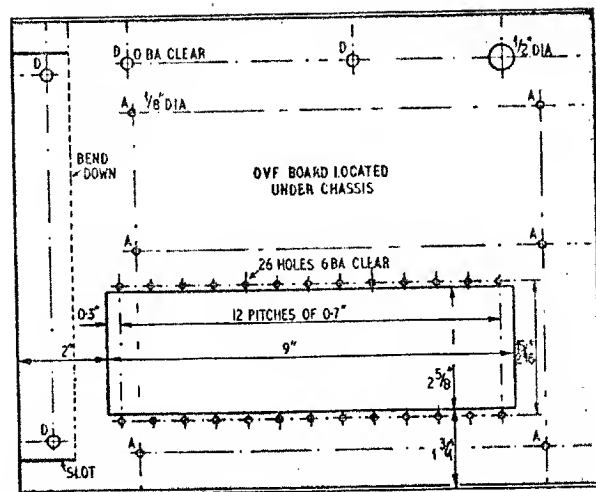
The OVF board is mounted on the underside of the chassis in the four holes marked "A" in the main chassis plate
